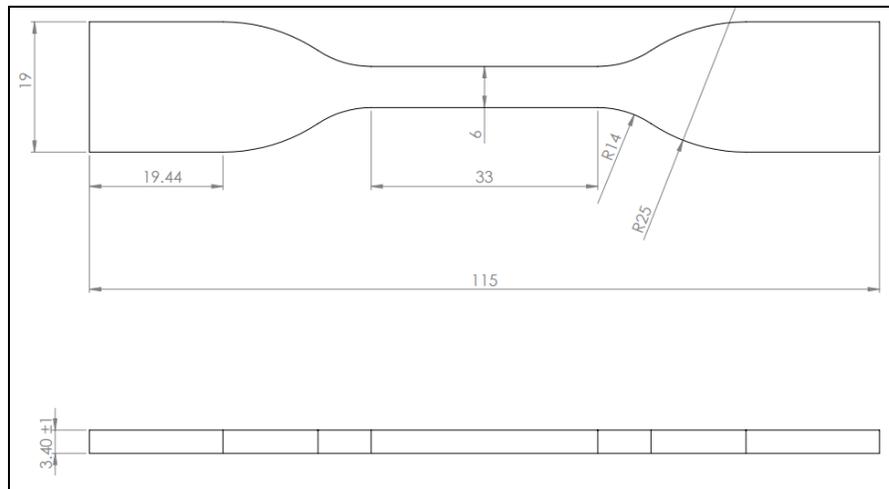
ASTM Type IV Tensile Specimen (units in mm)
